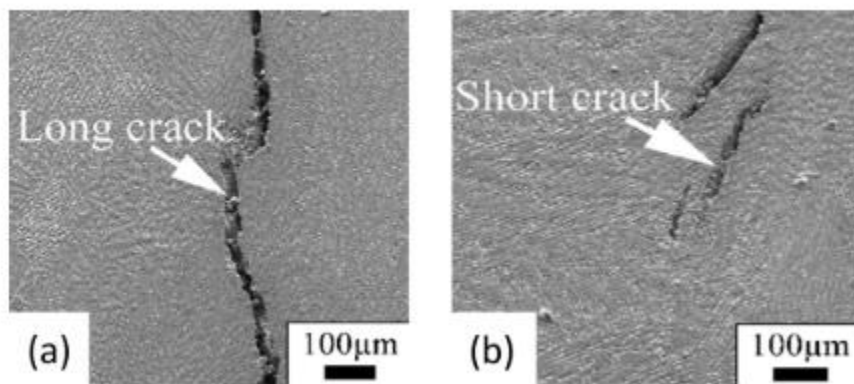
Cracking, (a) long crack, and (b) short crack, from Zhao et al. [17].
